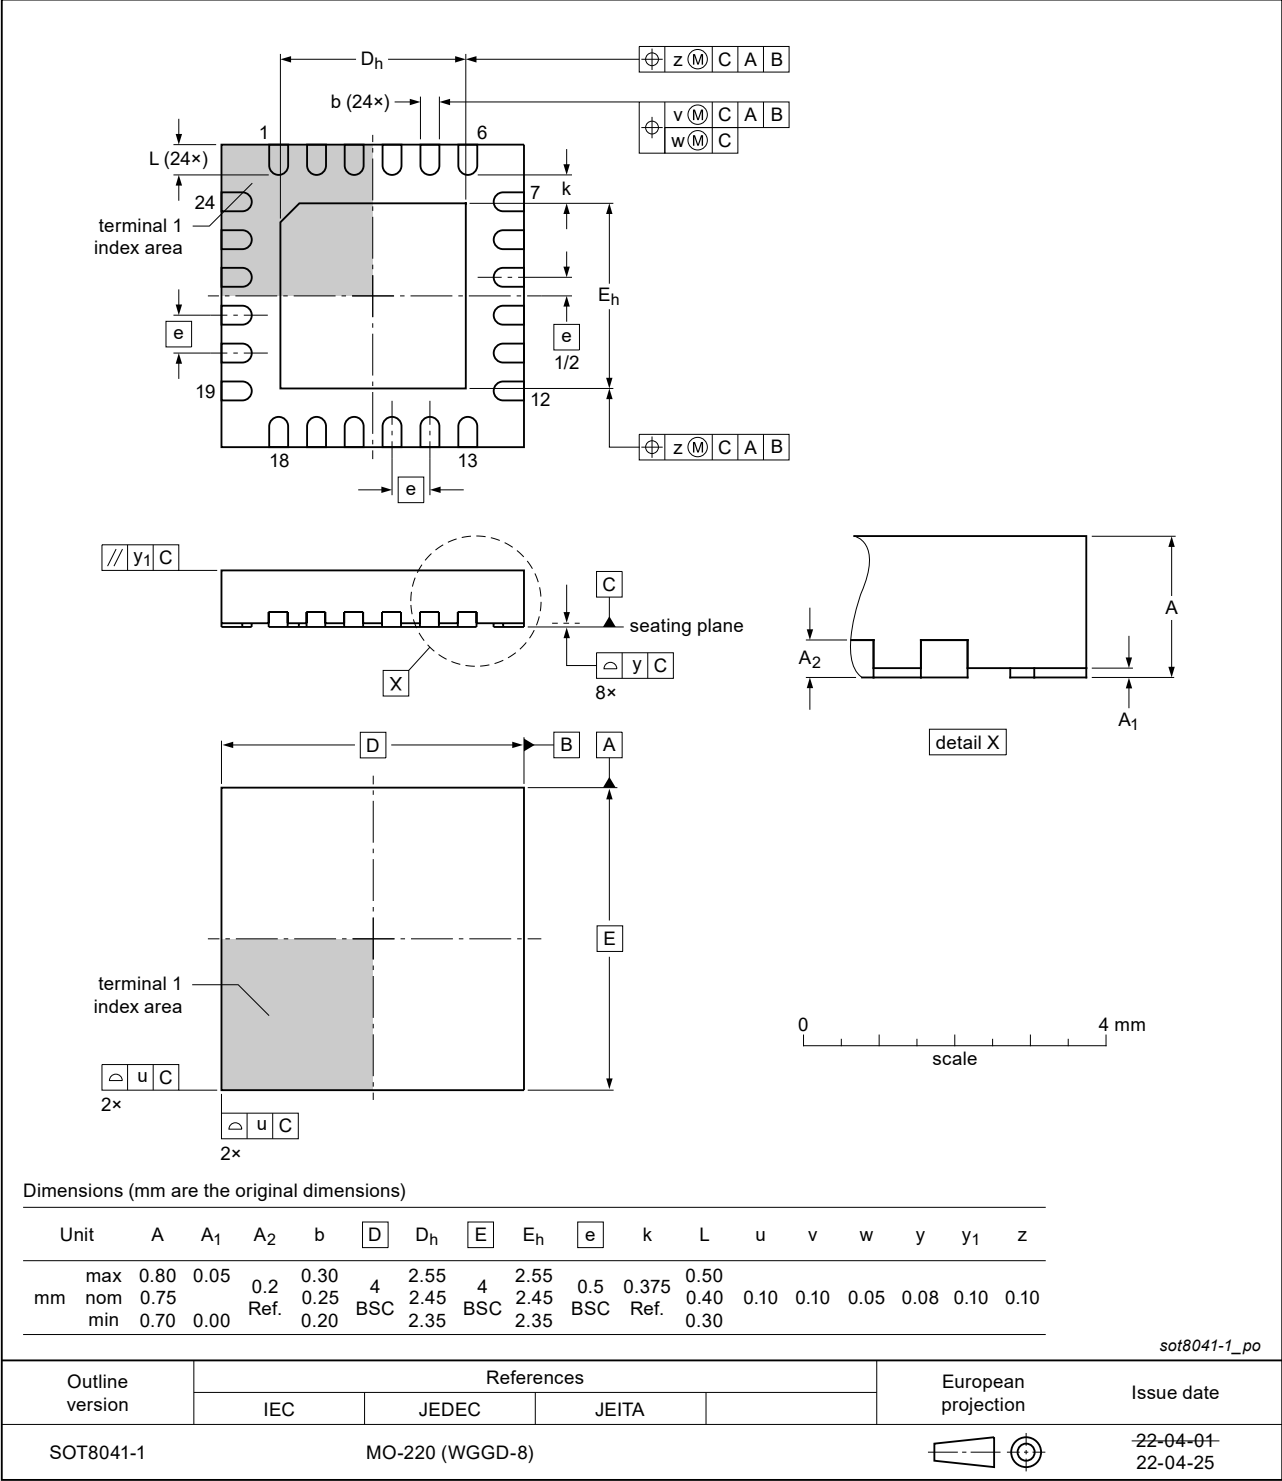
Package outline SOT8041-1 (HWQFN24)
